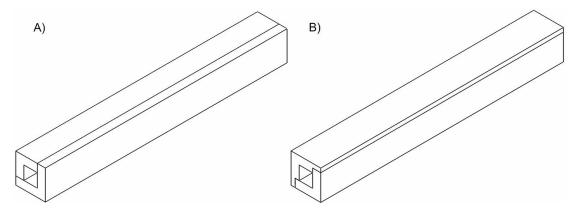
A) Second, improved design. B) Self-positioning design of the chamber.
